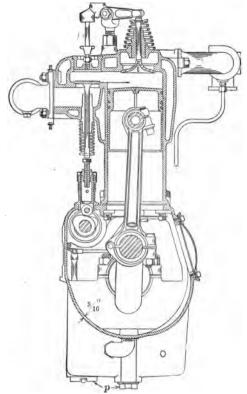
Reo 4-cylinder motor. $4\frac{1}{8}$ " $\times 4\frac{1}{2}$ ".
